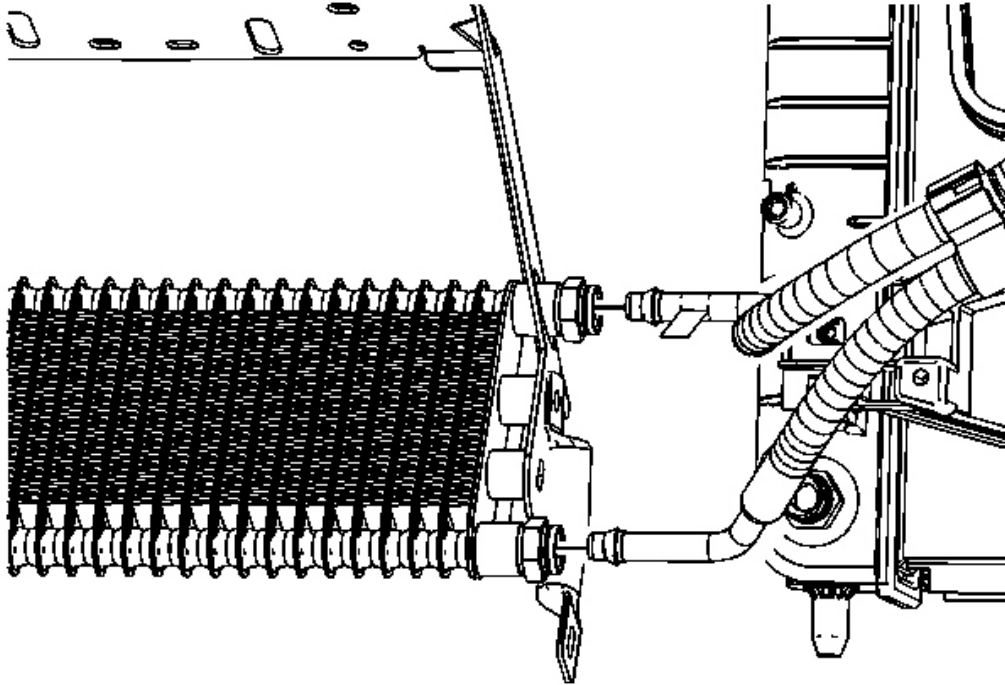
View Of External Engine Oil Cooler Quick Connect Fitting
